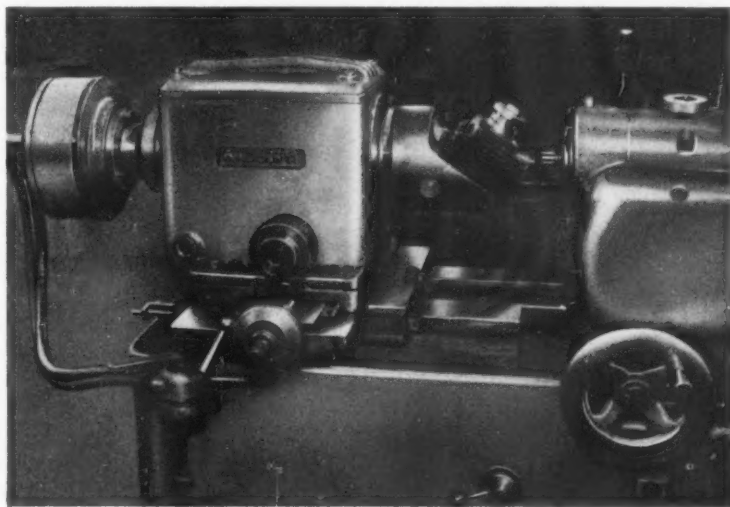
The Thread on the Exhaust Stub is Milled on this Special Innocenti-built Machine on which the Casting is Clamped by the Large Air Cylinder at the Left
